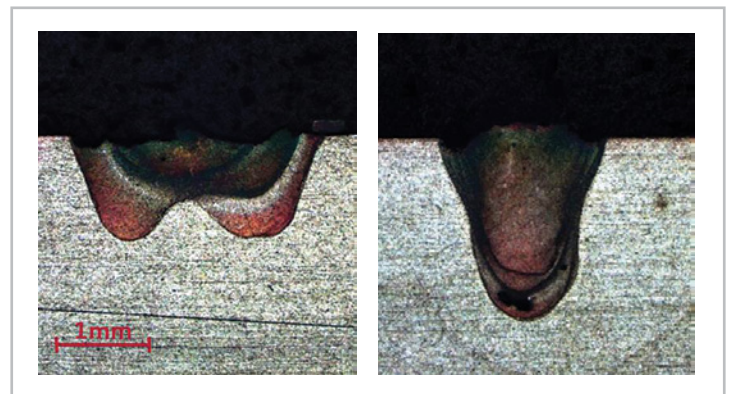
Cross sections of conventional laser beam welding (left) and welding with beam oscillation (right)
